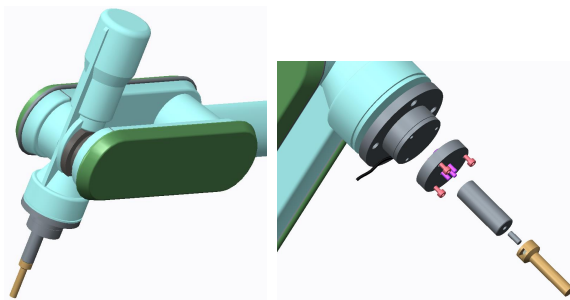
Representation of the robotic arm (left) and exploded view of its end (right).
